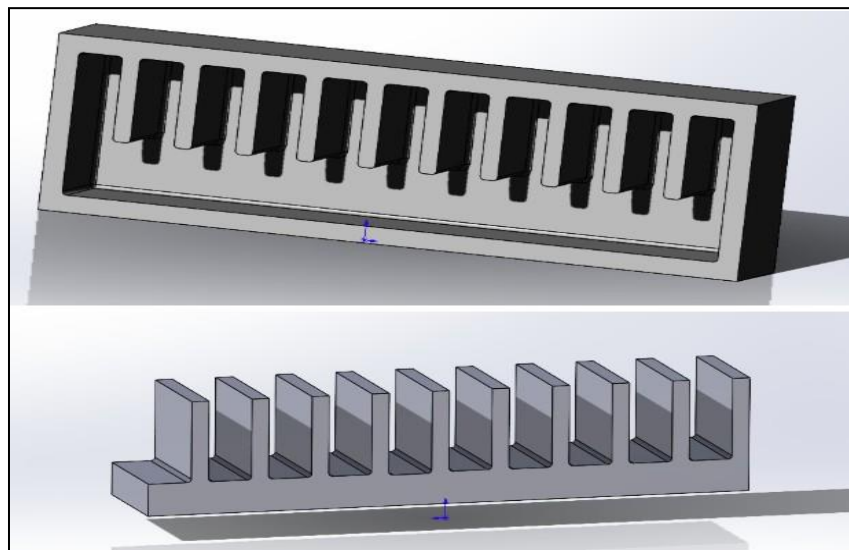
Soft gripper side (Top) and CAD model of the mold (Bottom)
